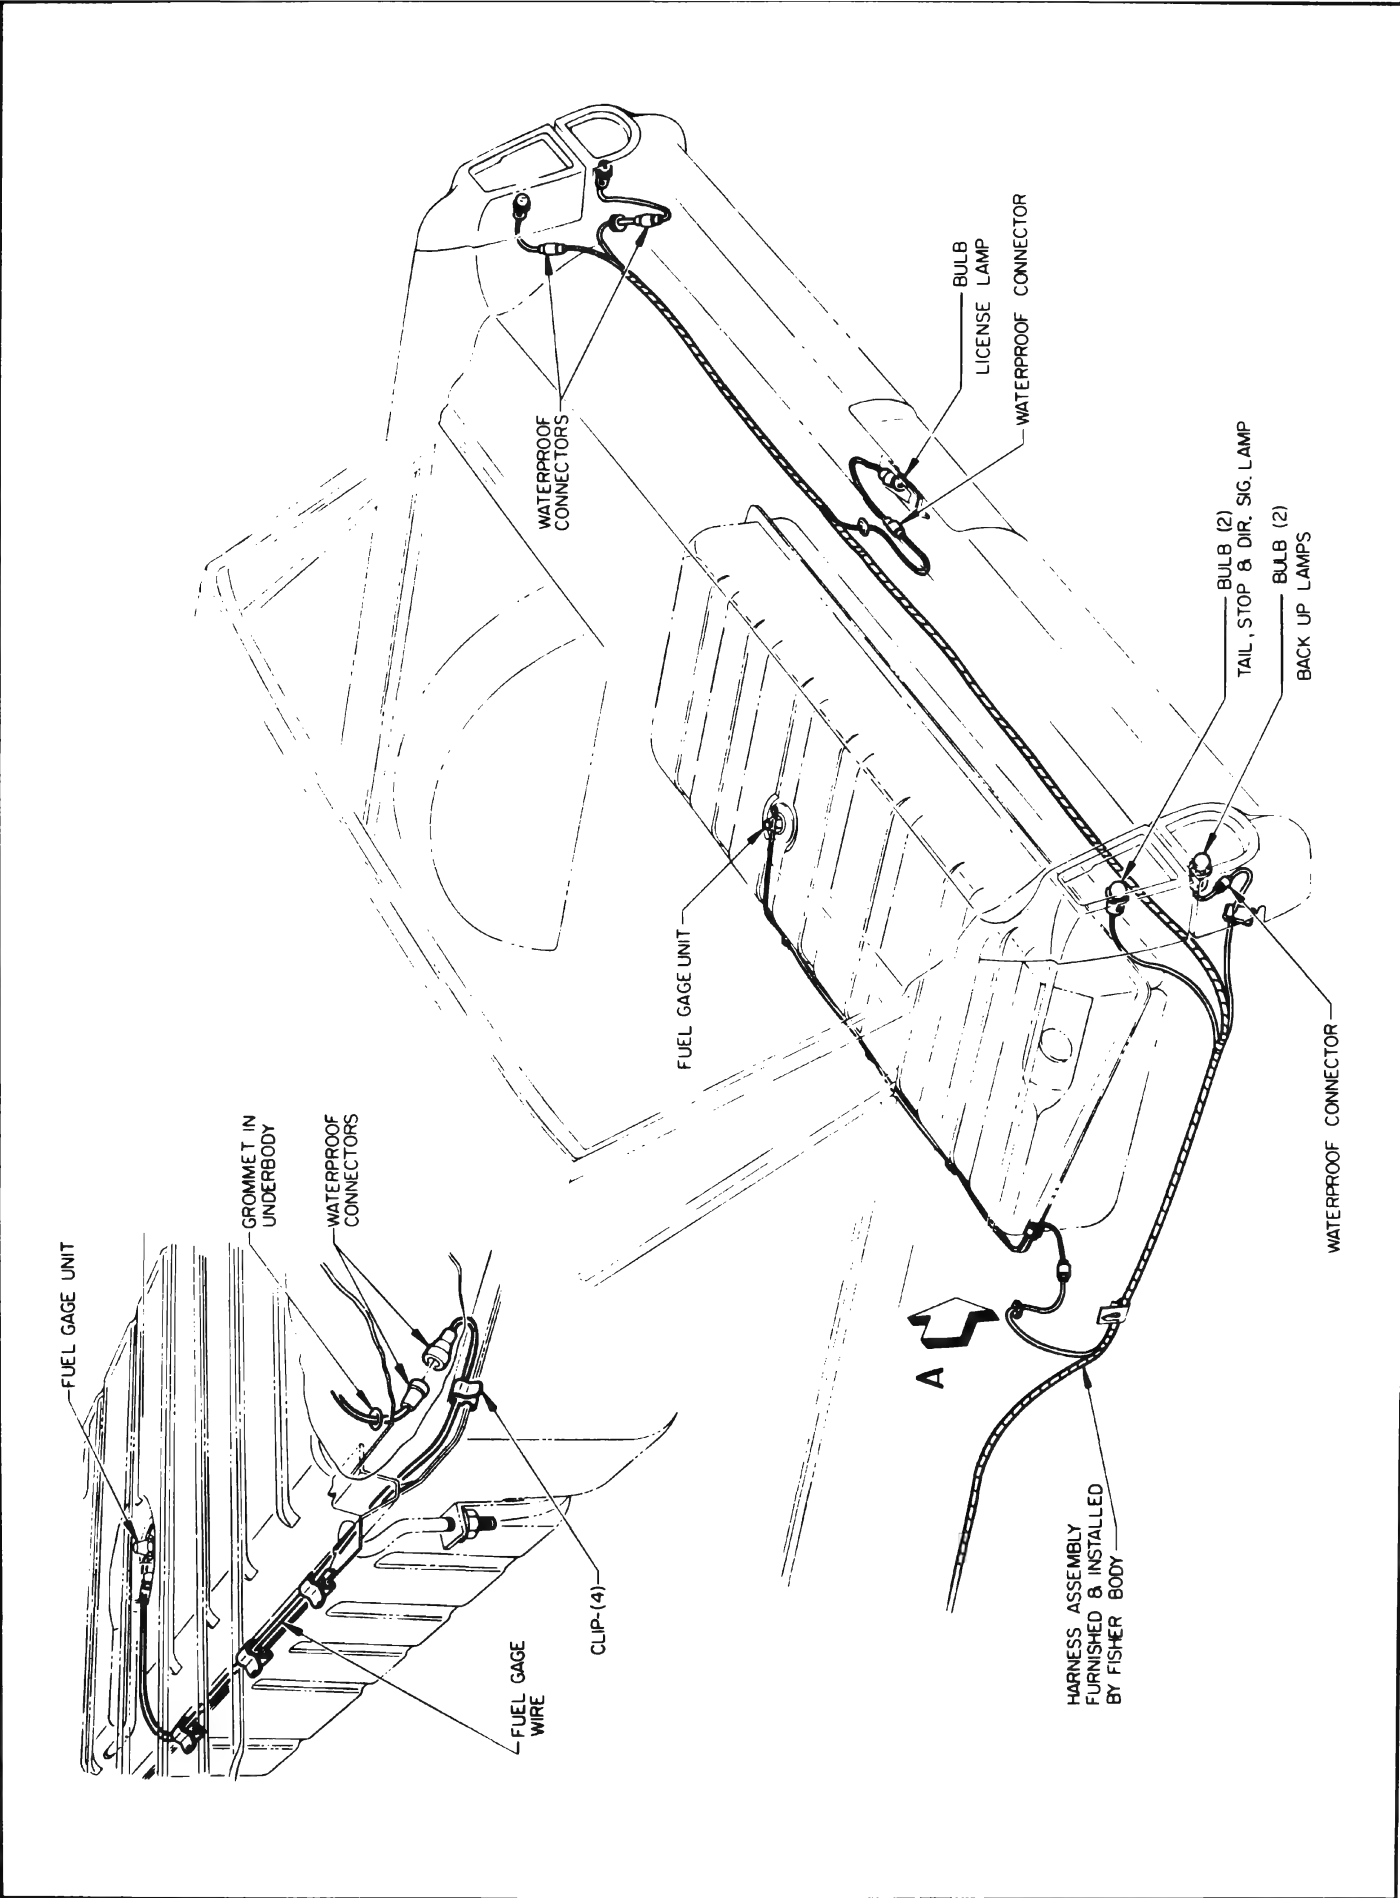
Rear Lamps and Fuel Gauge Wiring—Wagons
